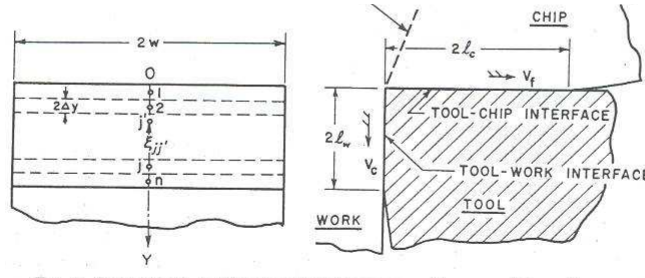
Moving heat source at the interface between the tool flank wear land and workpiece[62].
